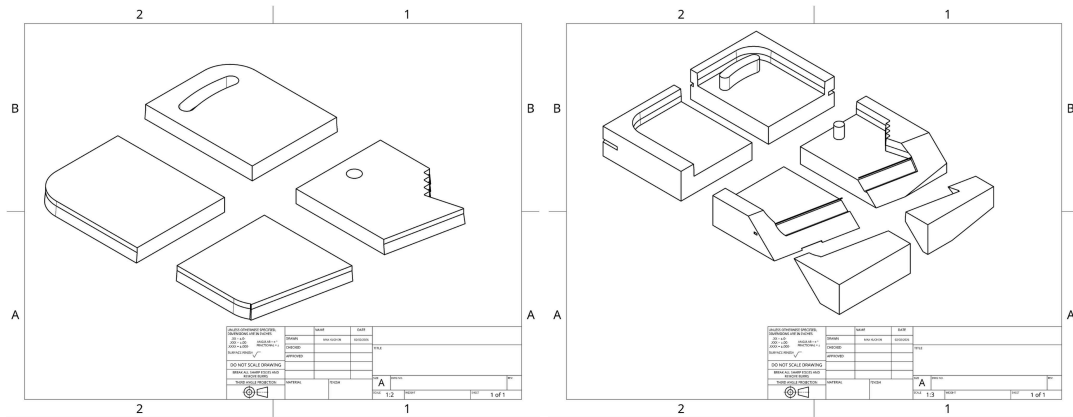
Complete male (left) and female (right) endplate mold assembly drawings.
